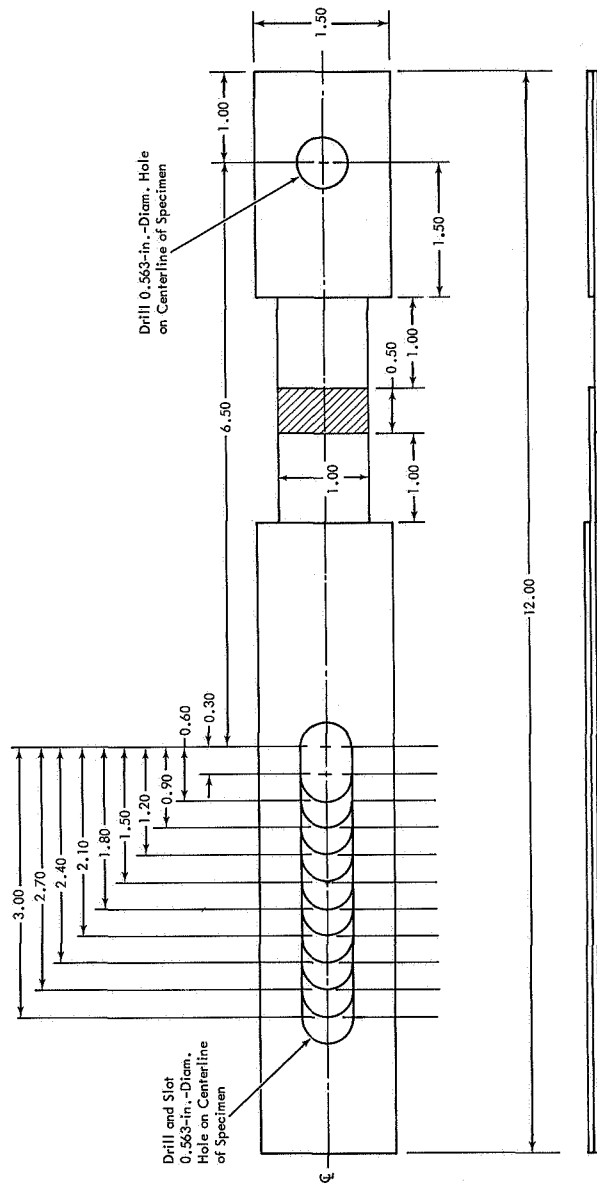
Typical Lap-Shear Adhesive Specimen
